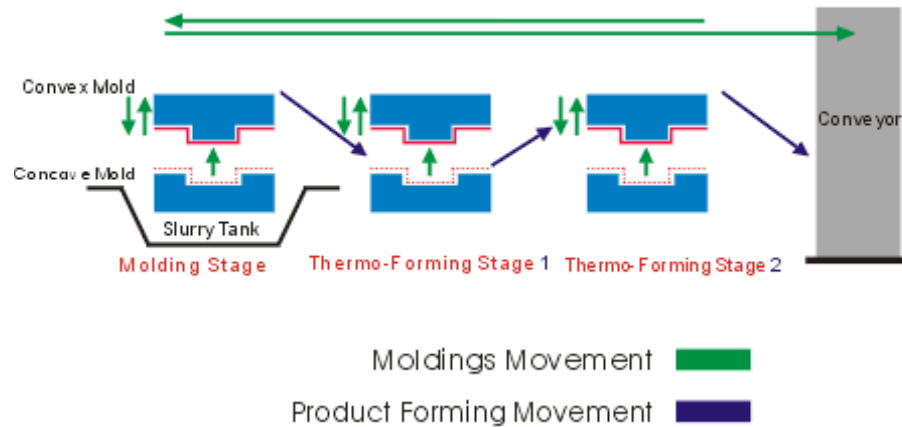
Diagram of Pulp Molding Machine (TPMS Series: Molded Pulp Products Manufacturing Process, 2016)
